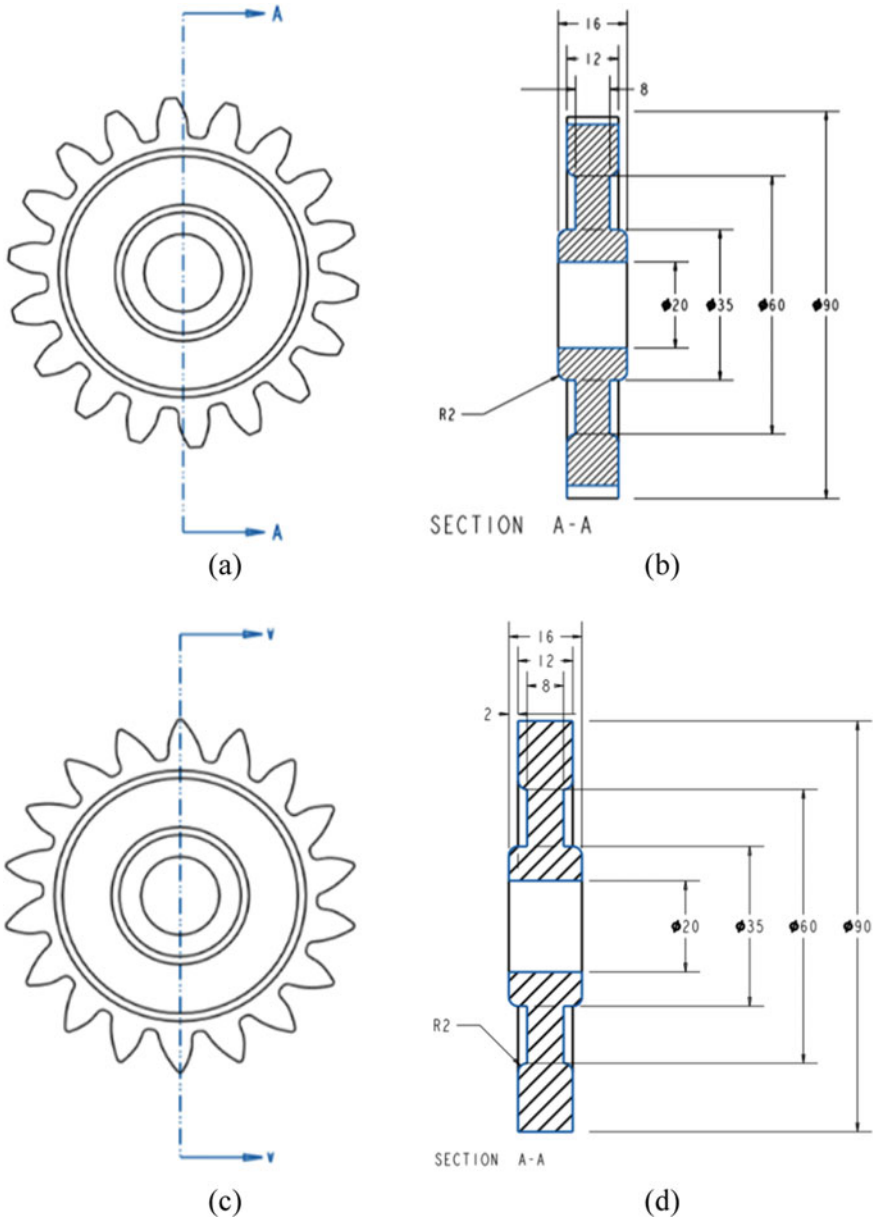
Gear geometry: a, b front view and cross-sectional view of standard gear, respectively, c, d front view and cross-sectional view of asymmetric gear, respectively (all dimensions are in mm)
